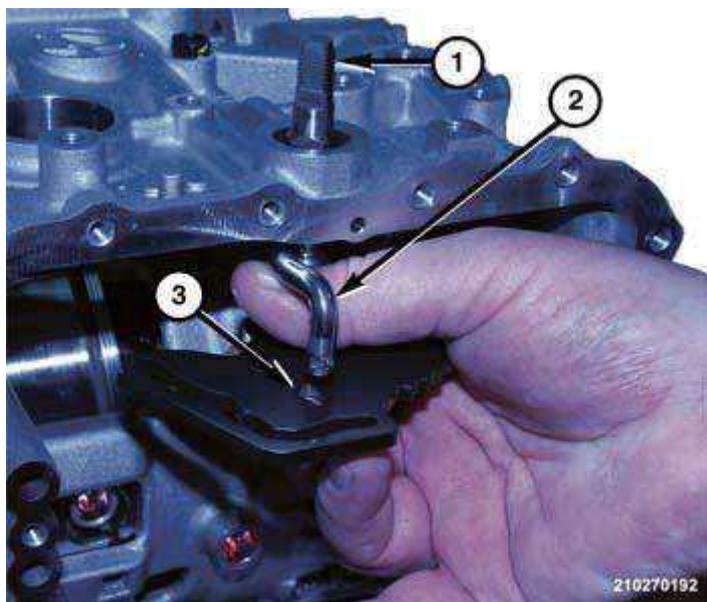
Manual Shaft, Park Rod & Key Hole Slot
